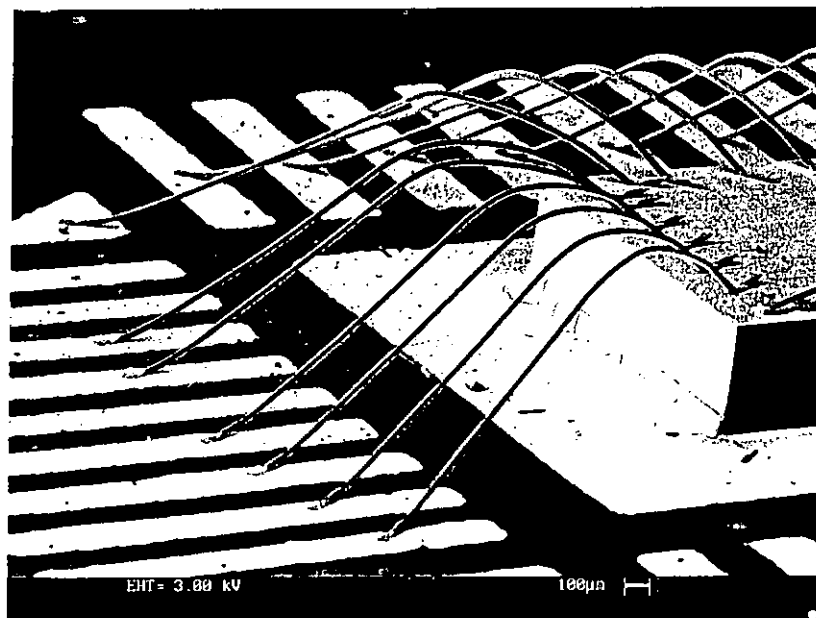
A side view of typical aluminum wire wedge bonds.
